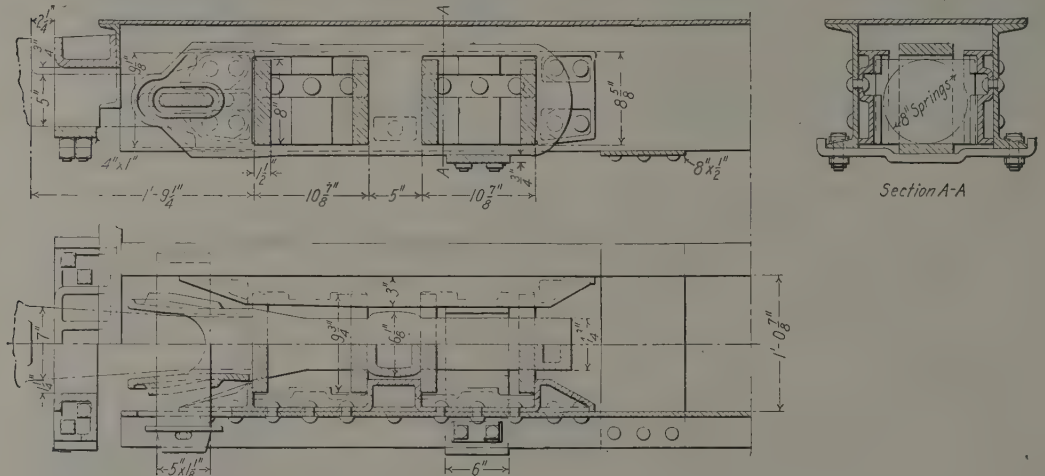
General Application to Steel Underframes of Universal Tandem Keyed Yoke and Attachments Used with Class G Springs. Universal Draft Gear Attachment Company.
